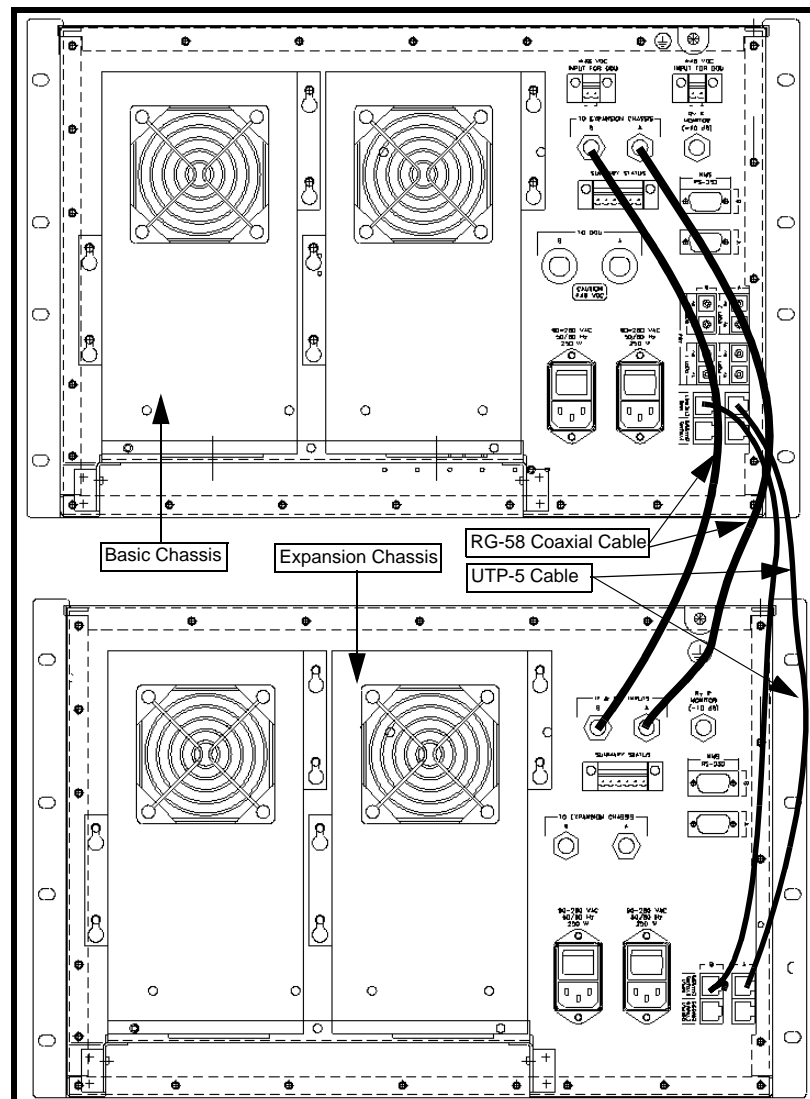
Basic Chassis Connection to Expansion Chassis (Rear View)
